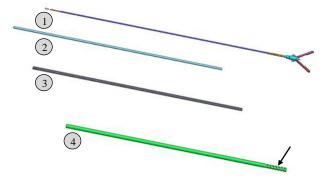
The four parts which must be separated in a design based on disassembly. From top to bottom, the components are: 1. the inner drive cable, grasper and inner support rings; 2. Inner cable support tube; 3. Array of cables; 4. Outer shaft tube and cable rings. This is a rough model of the outer shaft and cable rings. The groove pattern identified by the arrow is meant to represent the cable rings. (Image created from a model provided by Deam Corporation.)
